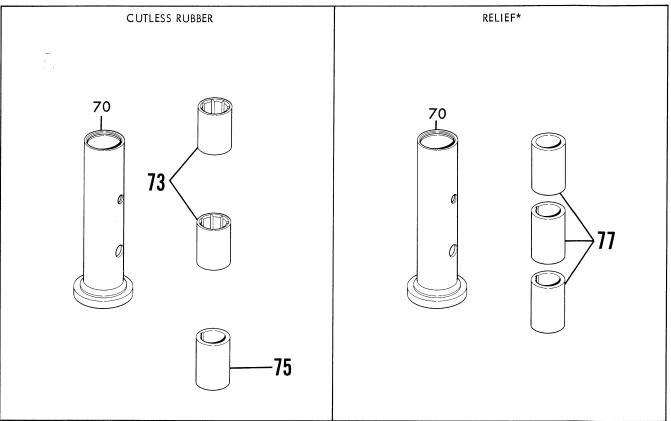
Model 631-632 Exploded View (Sheet 2 of 3)
